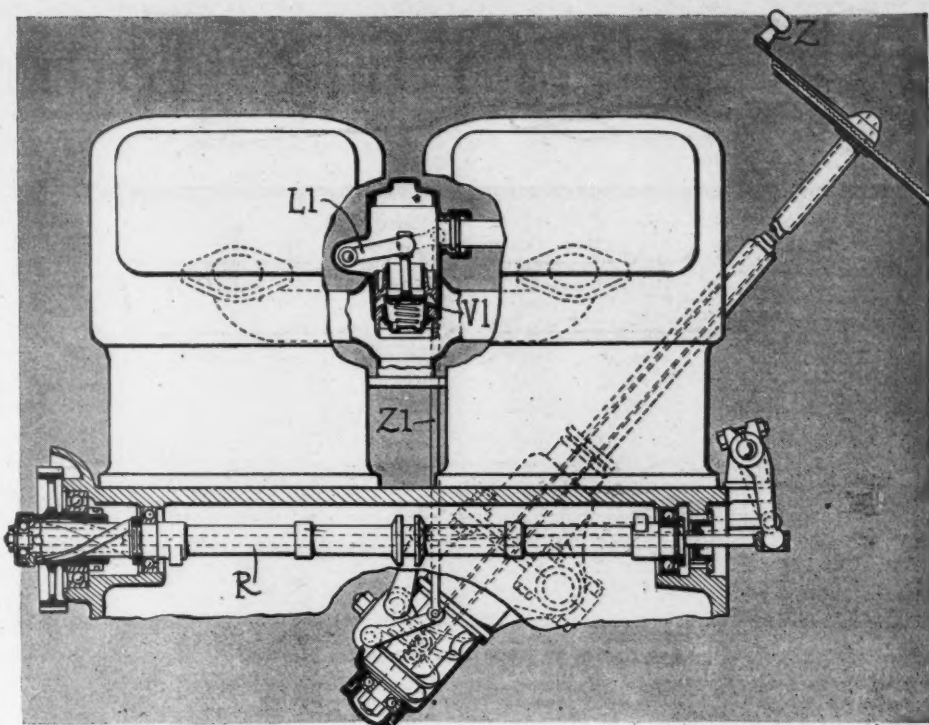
SAURER CARBURETOR WITH GOVERNOR AND HAND CONTROL
